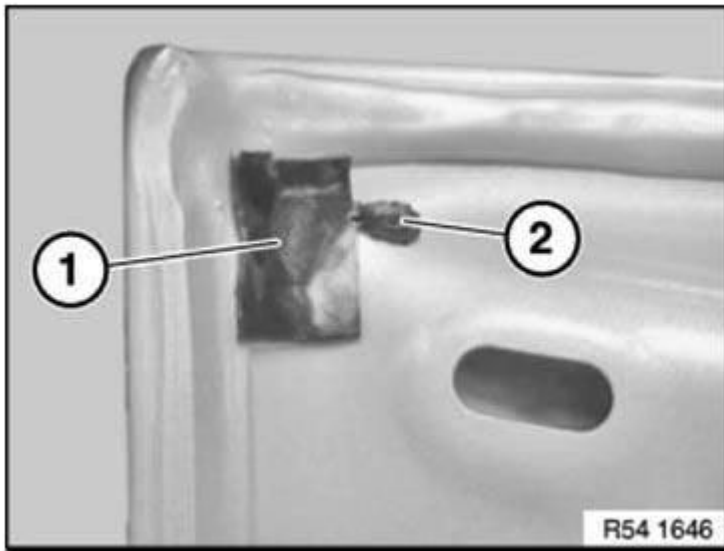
Identifying Butyl Pad And Butyl Ball Of Roof Shell
